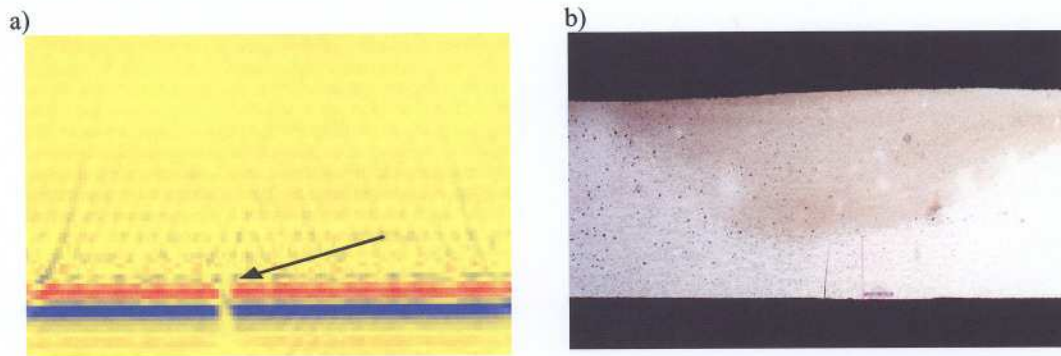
Cross-section of a butt joint showing a lack of penetration in 2-mm thick AA7075-T6 butt weld. a) SAFT image and b) corresponding metallography
